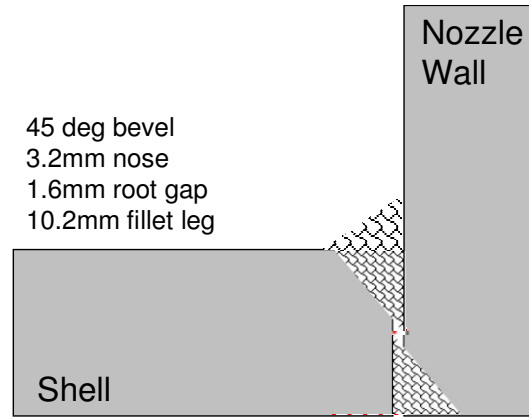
Modified Double Bevel Weld Groove Design
